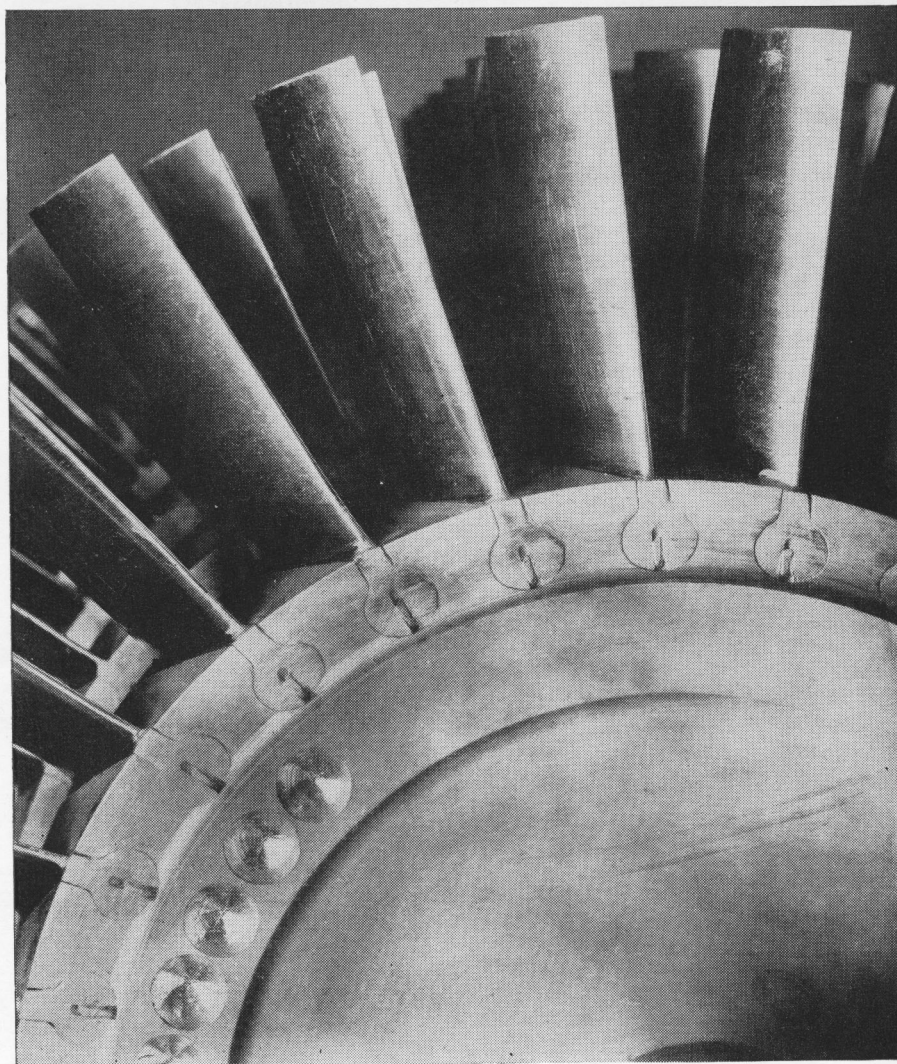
The compressor blades of the 19-B feature bulb-type roots are held in place in the milled disk by wire locking keys turned up into the grooved sides of the blade root.
